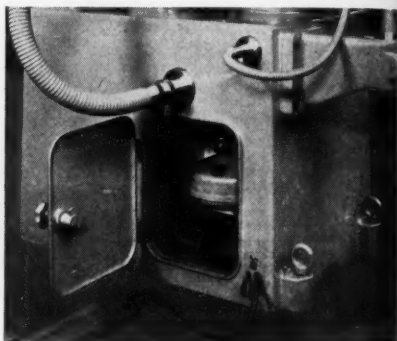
Rear of profile grinding machine, showing dust-removing apparatus.
